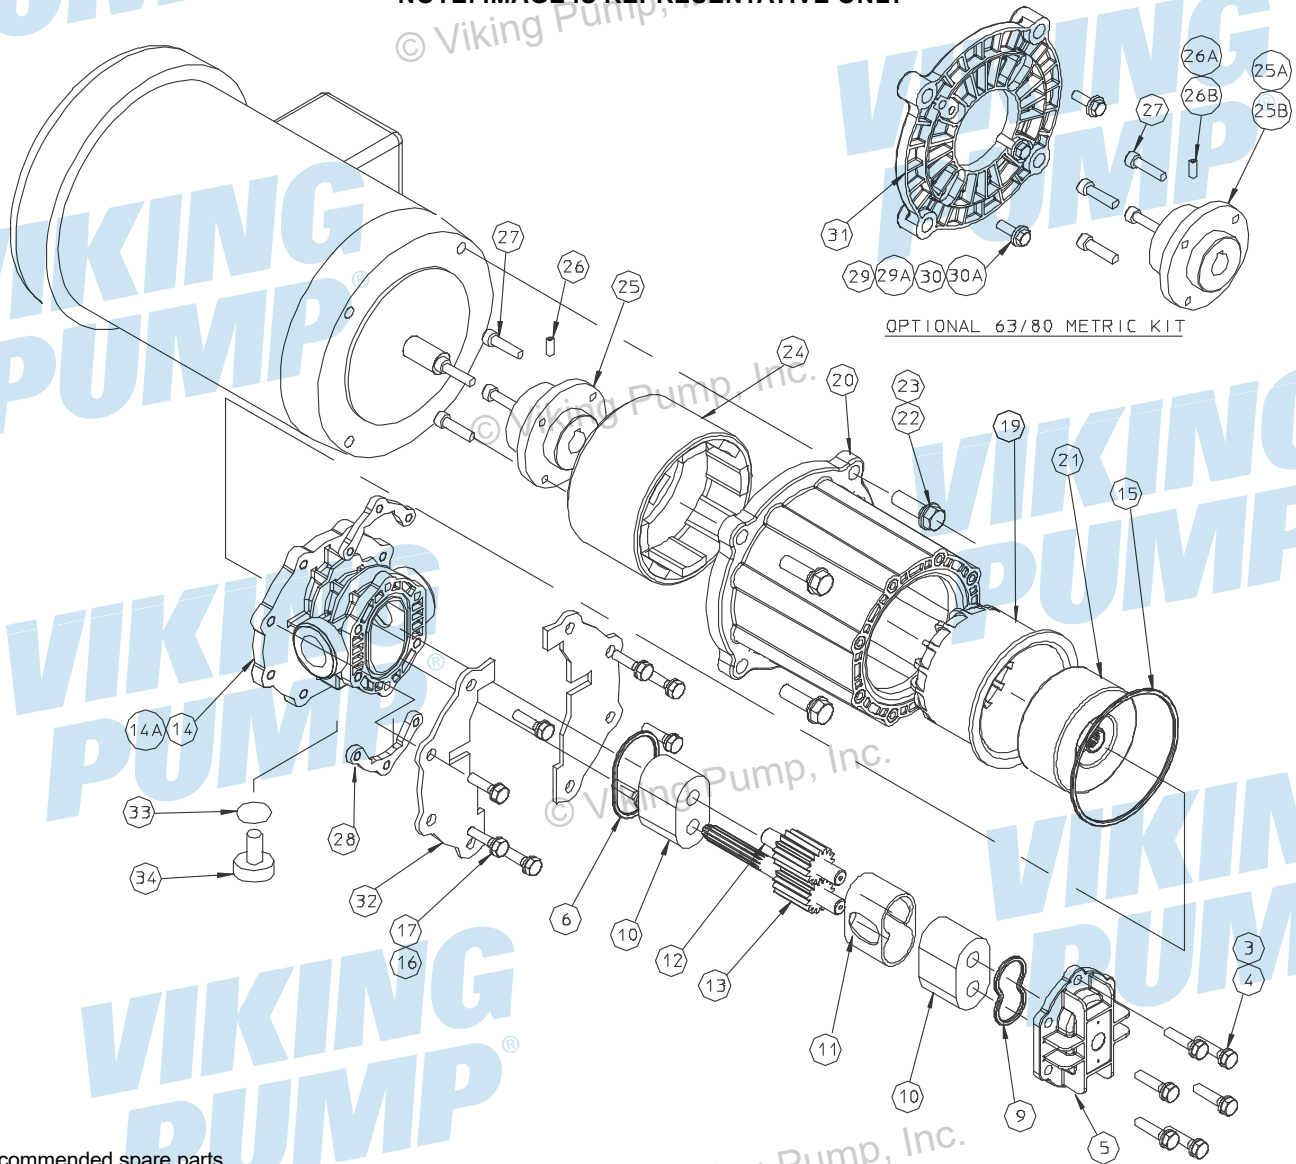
EXPLODED VIEW E05 PUMP (TYPICAL)
